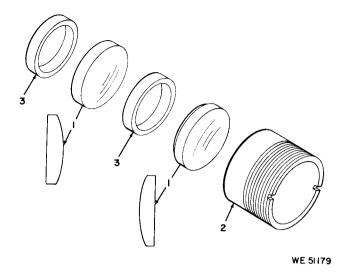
Magnetic needle magnifier assembly—partial exploded view.
